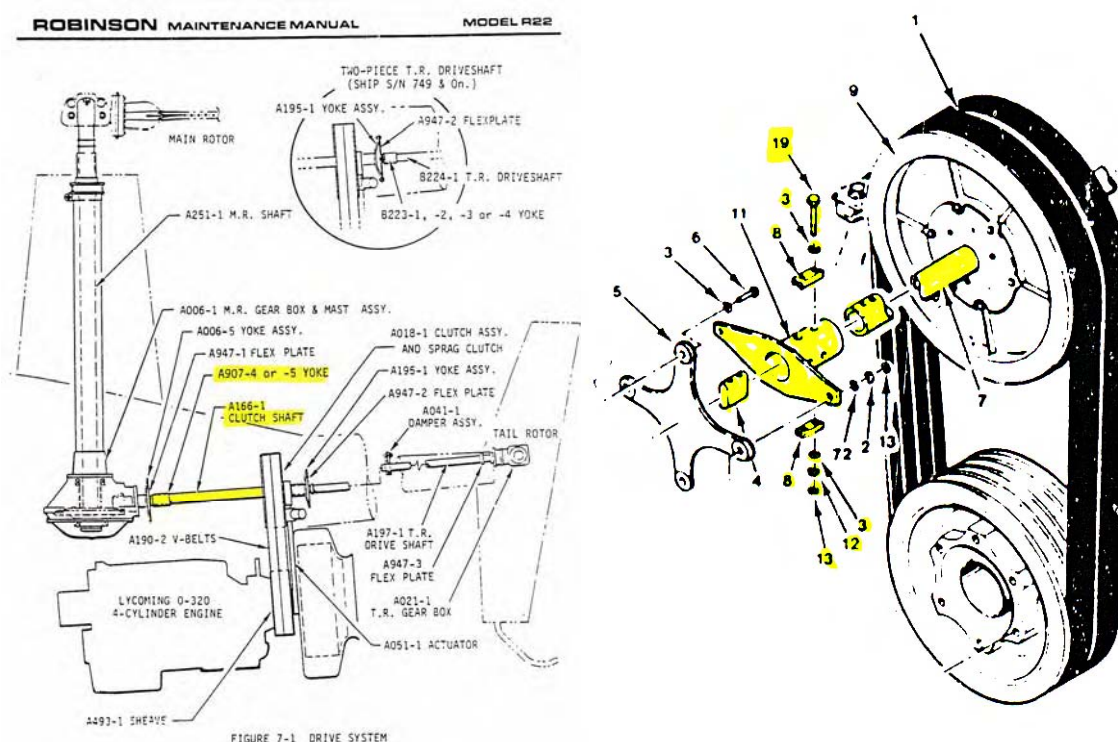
Illustrations of the clutch shaft and yoke components as part of the helicopter's main rotor drive system.
